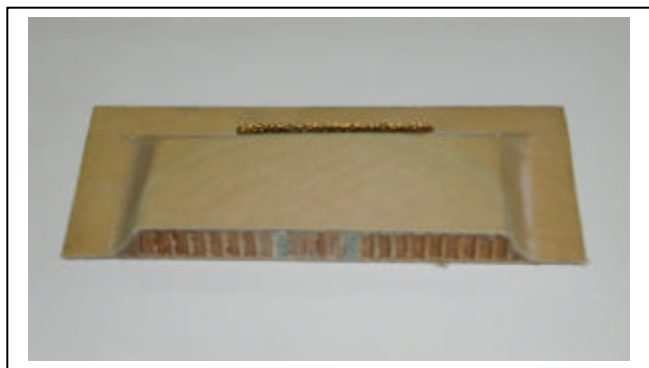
Repaired Sandwich Laminate. Center core removed and replaced.
